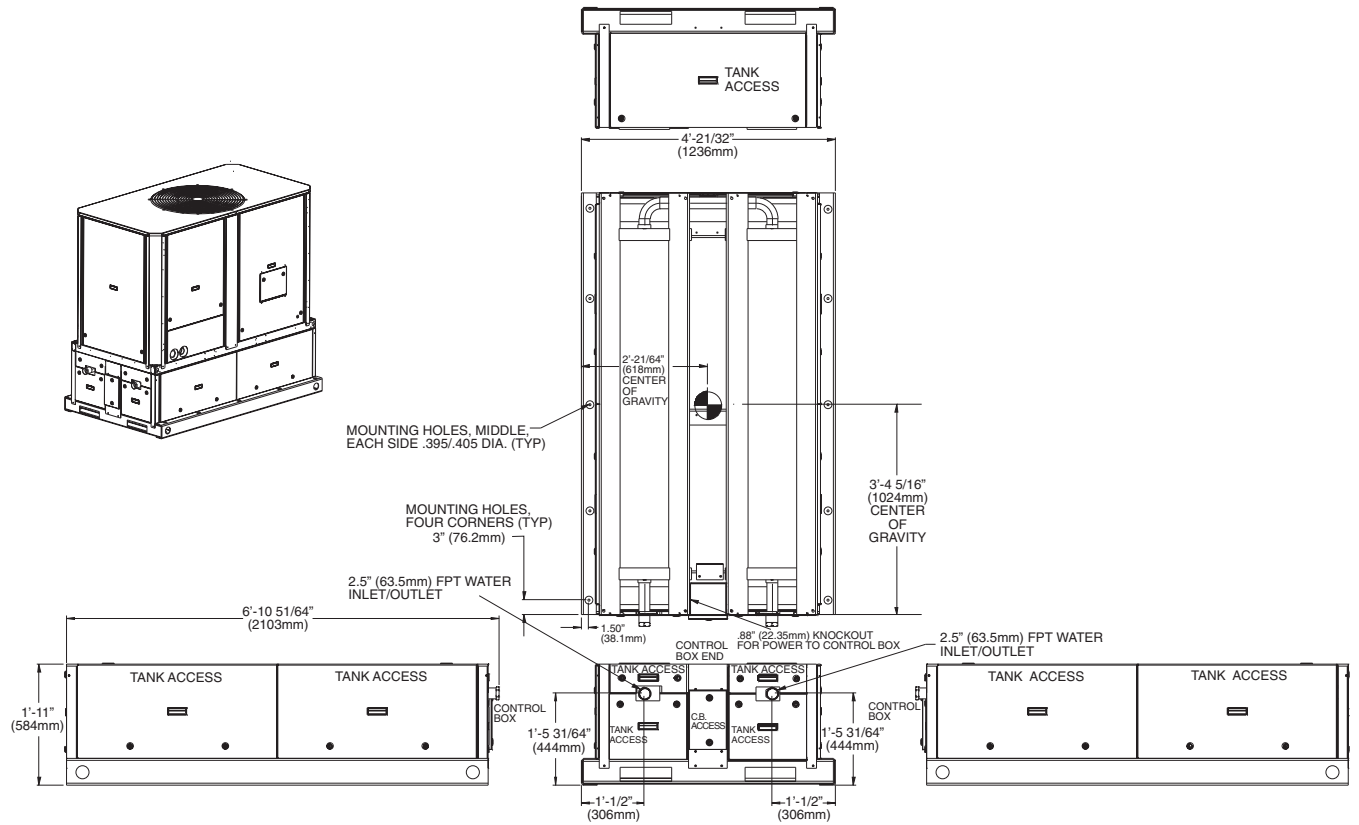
Dimensions 30RA-900-001 (Unit Sizes 010-018)
